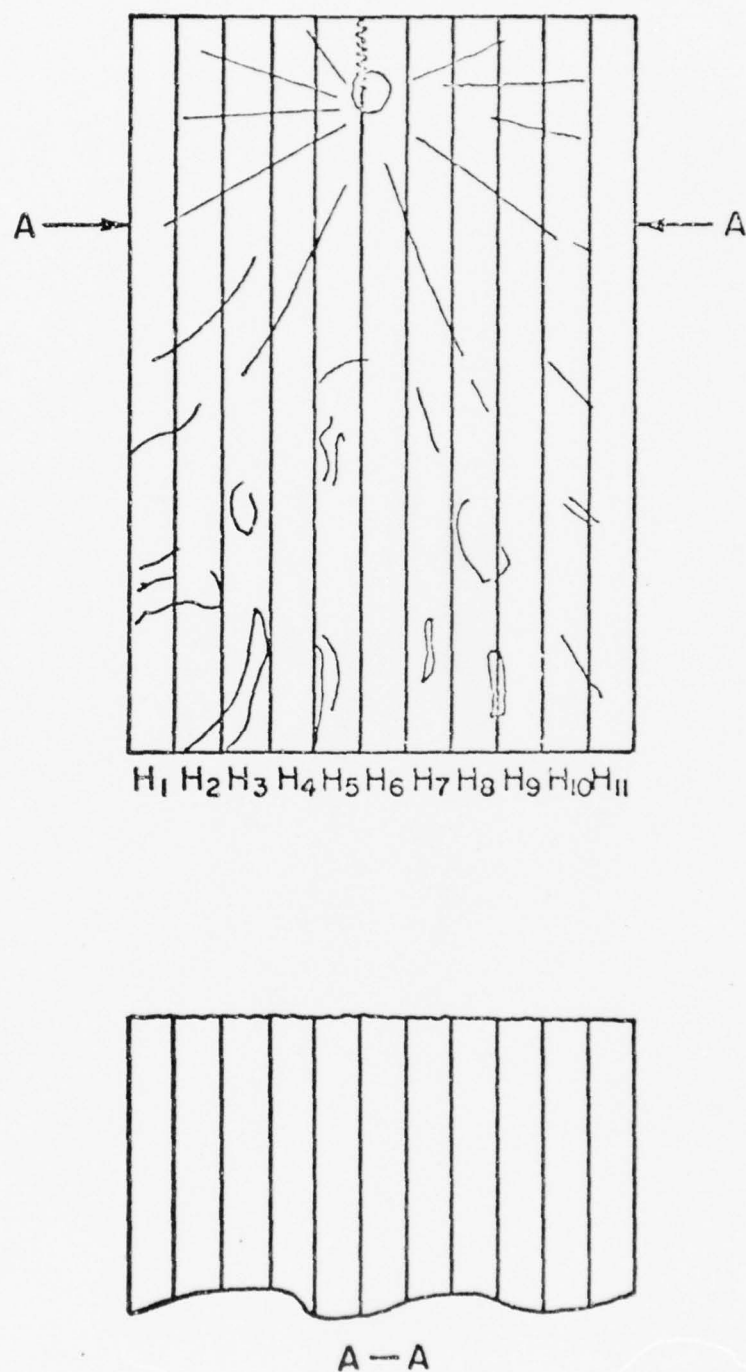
A Schematic Fractograph for Specimen D 304 ( $f_s = 0$ ). Crack originated from the interface between  $H_5$  and  $H_6$ . Brittle fracture occurred in the upper half of the specimen and shear dimple type in the lower half. The interfaces were indistinguishable.
